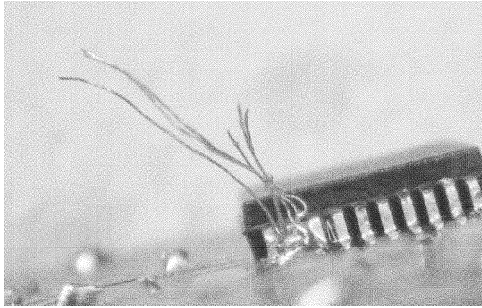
When trying to pull desoldering wick away from already cold solder, copper strands may separate, and then become very difficult to remove.
